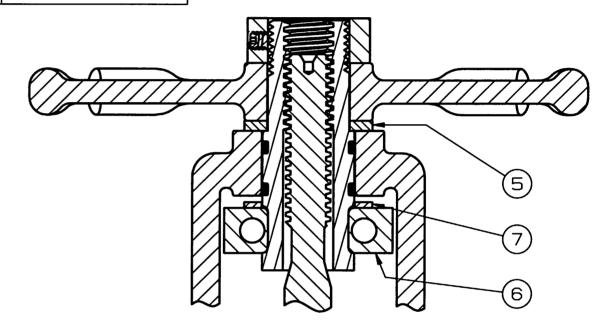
REPLACEMENT YOKE GLAND ASSEMBLY
